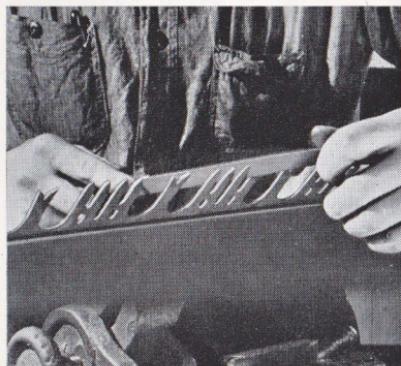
Sharpening cutting tooth on large Crosscut Saw
